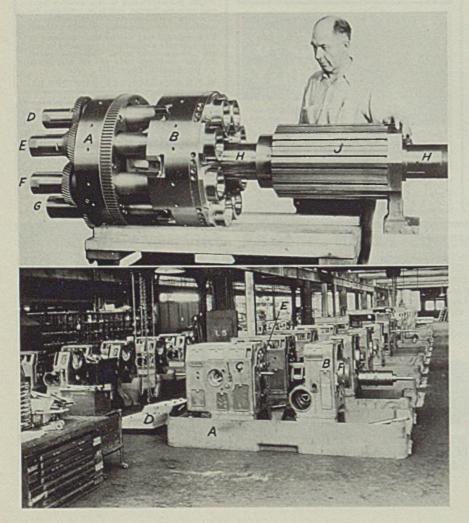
(Upper)—Spindles assembled in the spindle carrier. The integral spindle carrier stem carries the end-tool slide. Fig. 2. (Lower)—Part of the frame assembly line. Here the various frame members are put in place and accurately aligned before the machines go to the final assembly
